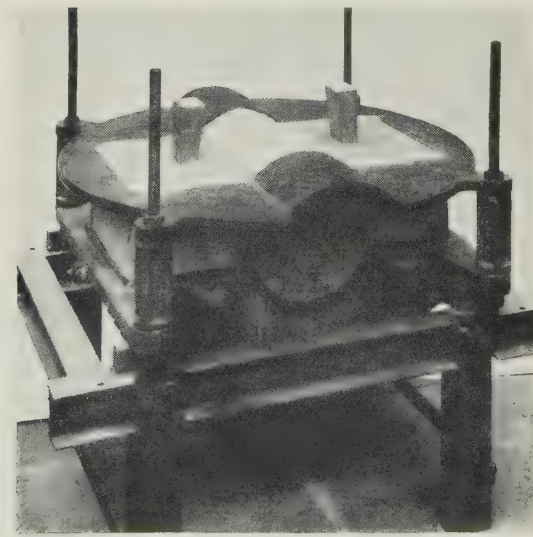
Ramming Completed to Furnace-Casing Plate.
